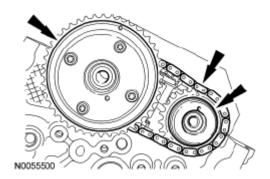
Locating LH Secondary Timing Assembly Courtesy of FORD MOTOR CO.
